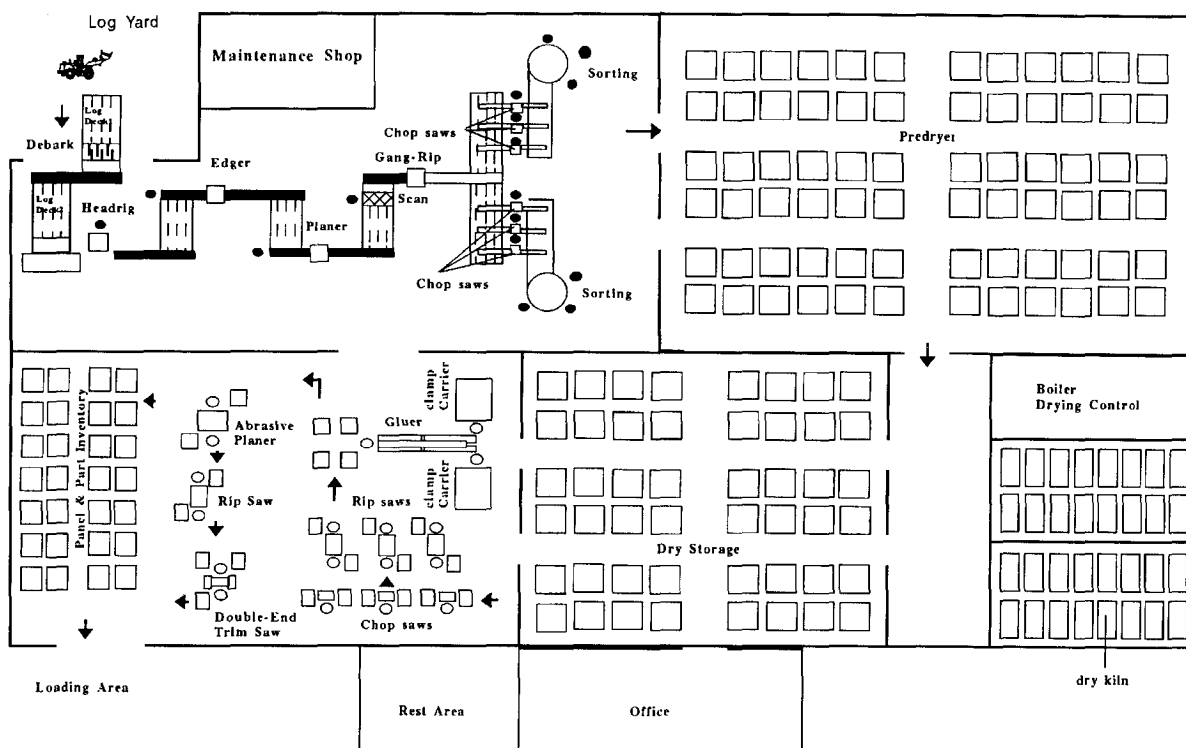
Mill layout of the studied dimension manufacturing plant.
